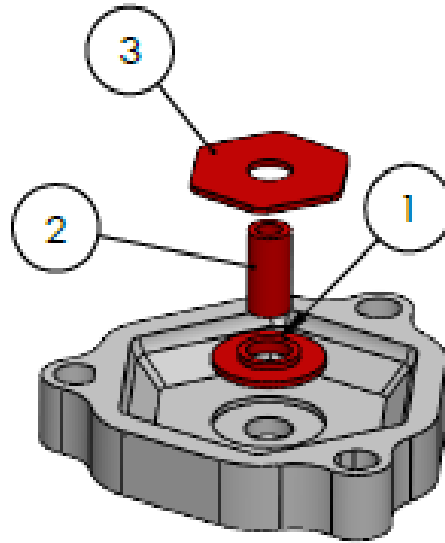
Open-base mould (top face, pneumatic inlet). (1) Joining ring with housing; (2) pneumatic inlet tube, positioned flush with the ring top surface; (3) stiffening ring with central bore, bonded to the tube during encapsulation.
